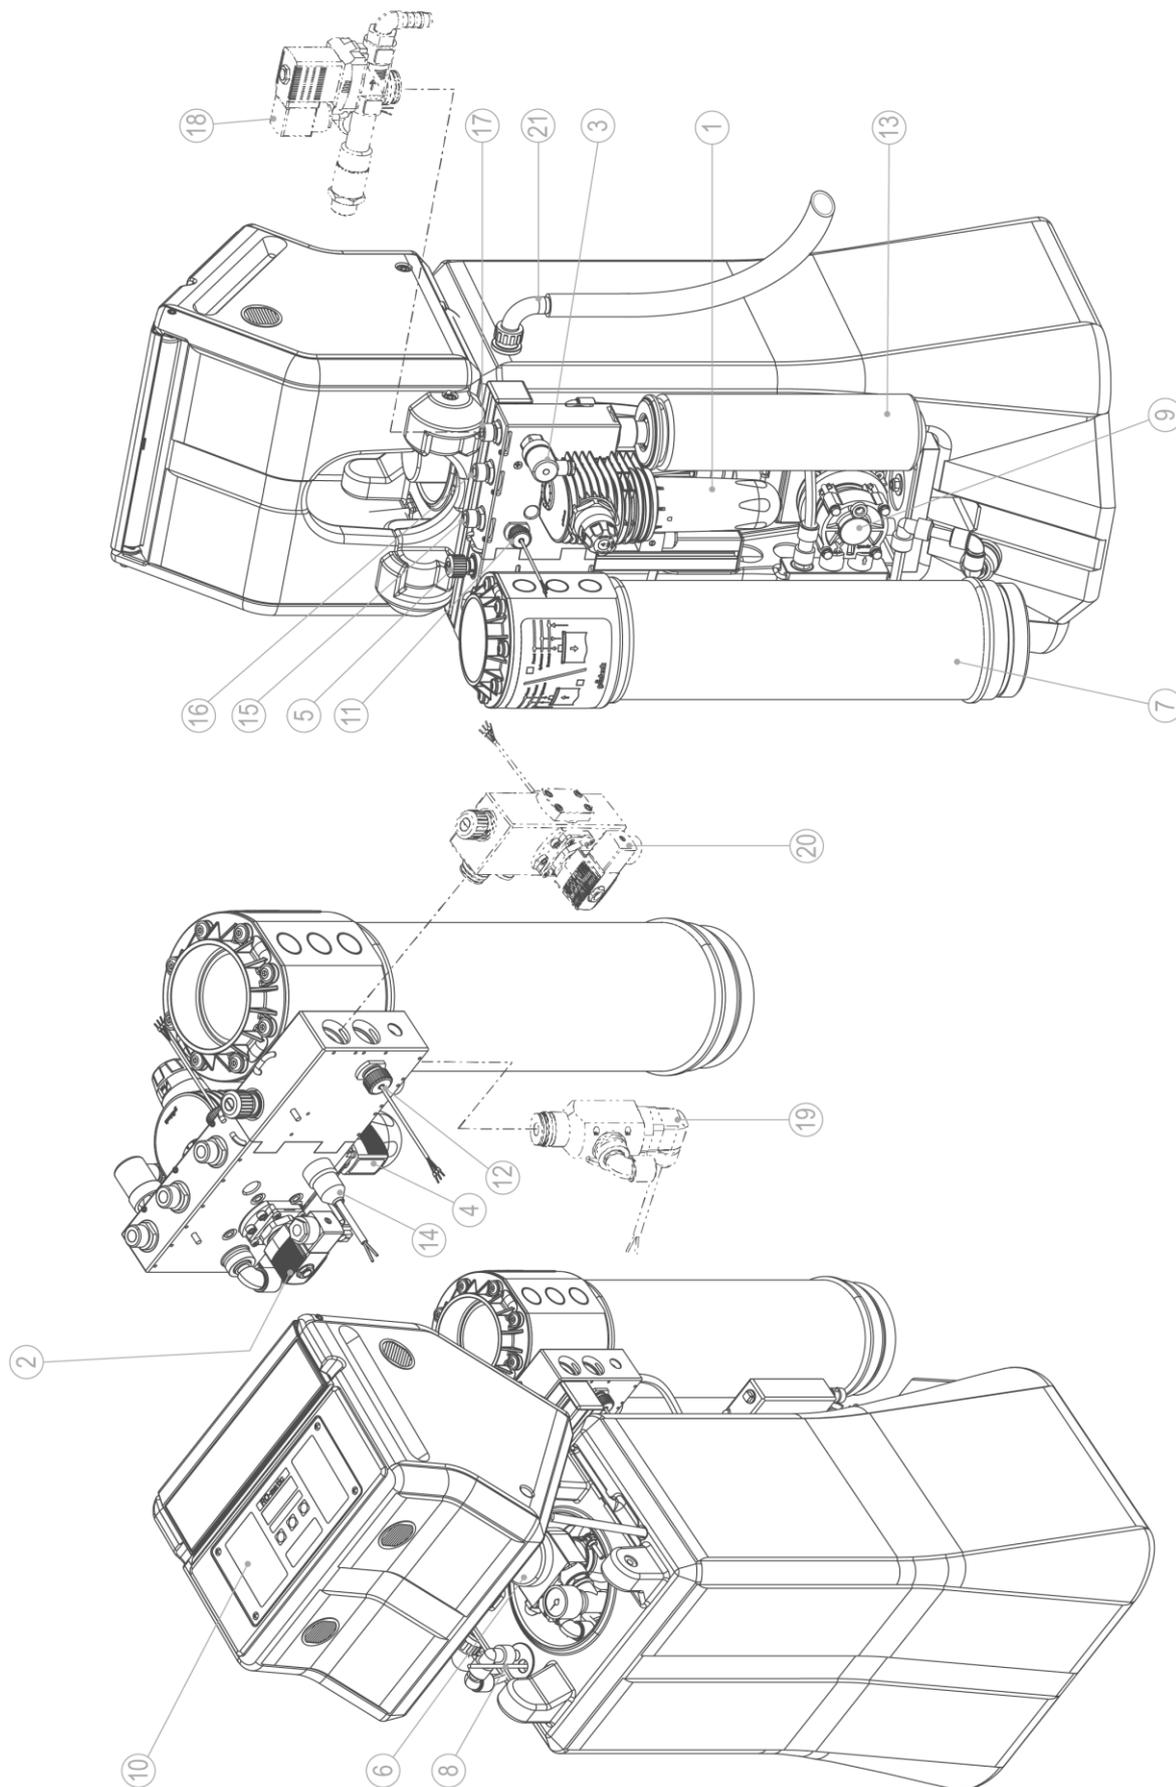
Exploded drawing of reverse osmosis system GENO-OSMO 125K-TS
